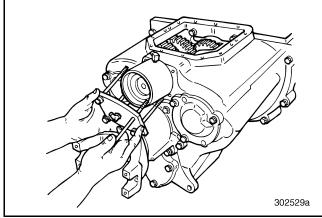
Installing Range Shift Cylinder, Capscrews, Cover and O-Ring
